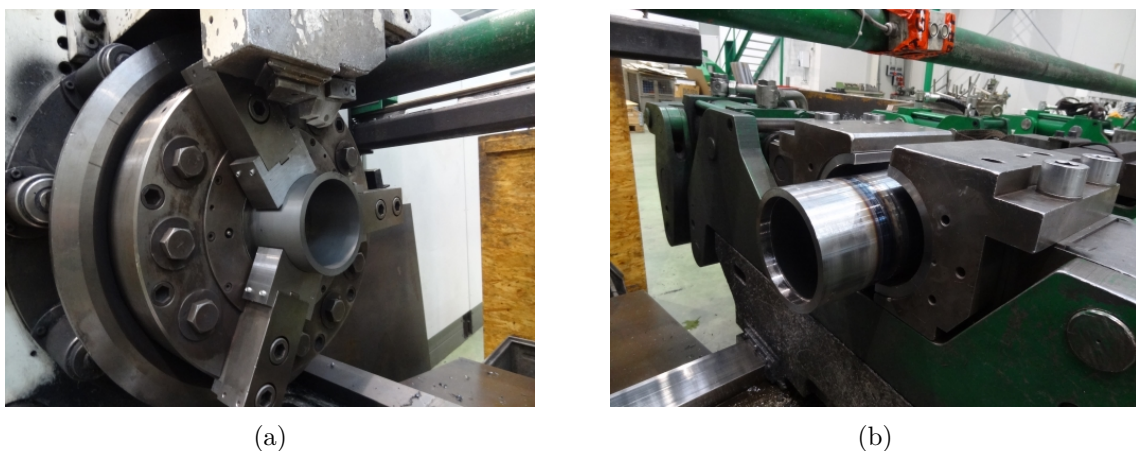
Clamping in the *HR 1250* RFW machine, (a) the rotary part clamped by a 3-jaw chuck in the spindle and (b) the stationary part clamped by semi-shells
